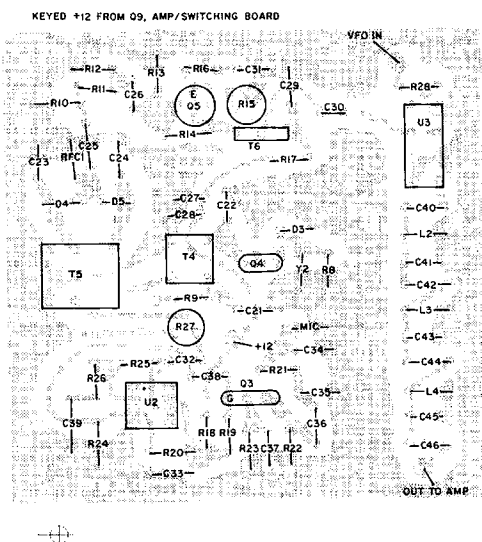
(a) The balanced modulator/mixer foil pattern.
